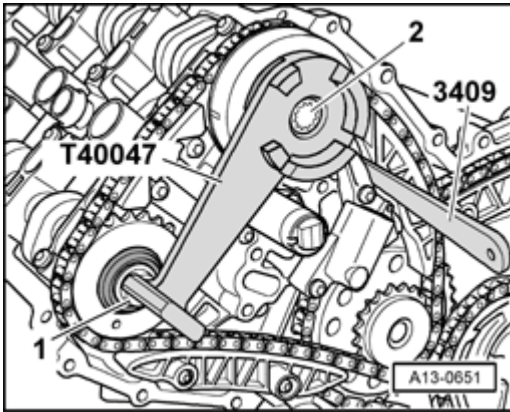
Securing Hall Sensor Wheel On Camshaft Adjuster Of Intake Camshaft Of Left Cylinder Head Using Setting Gauge T40047
